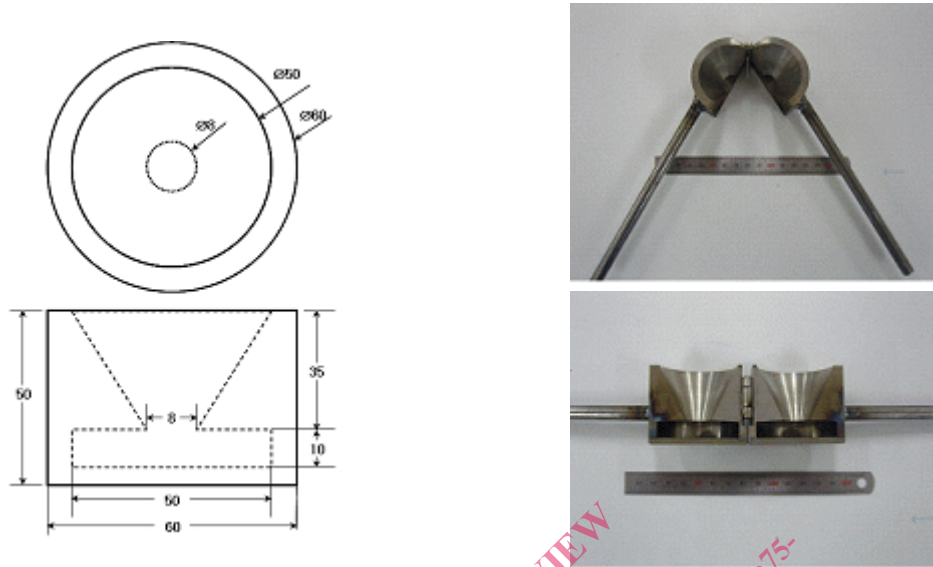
The shape and dimension of mold for brightness test specimen from molten metals.
